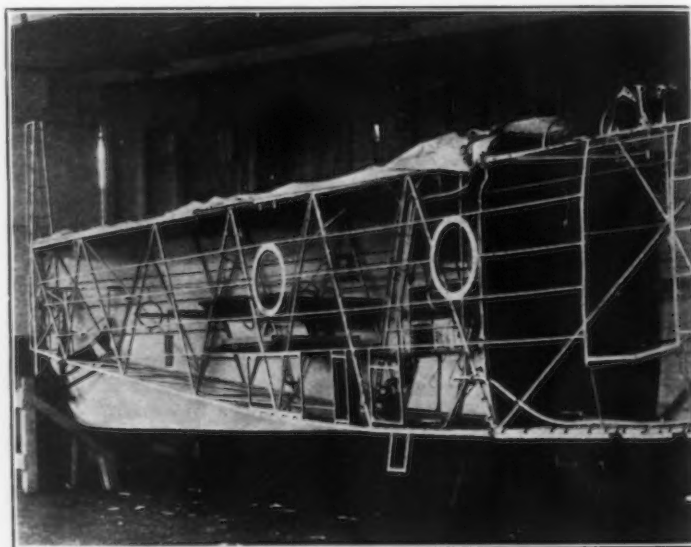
Typical Assembly of Welded Trusses in
